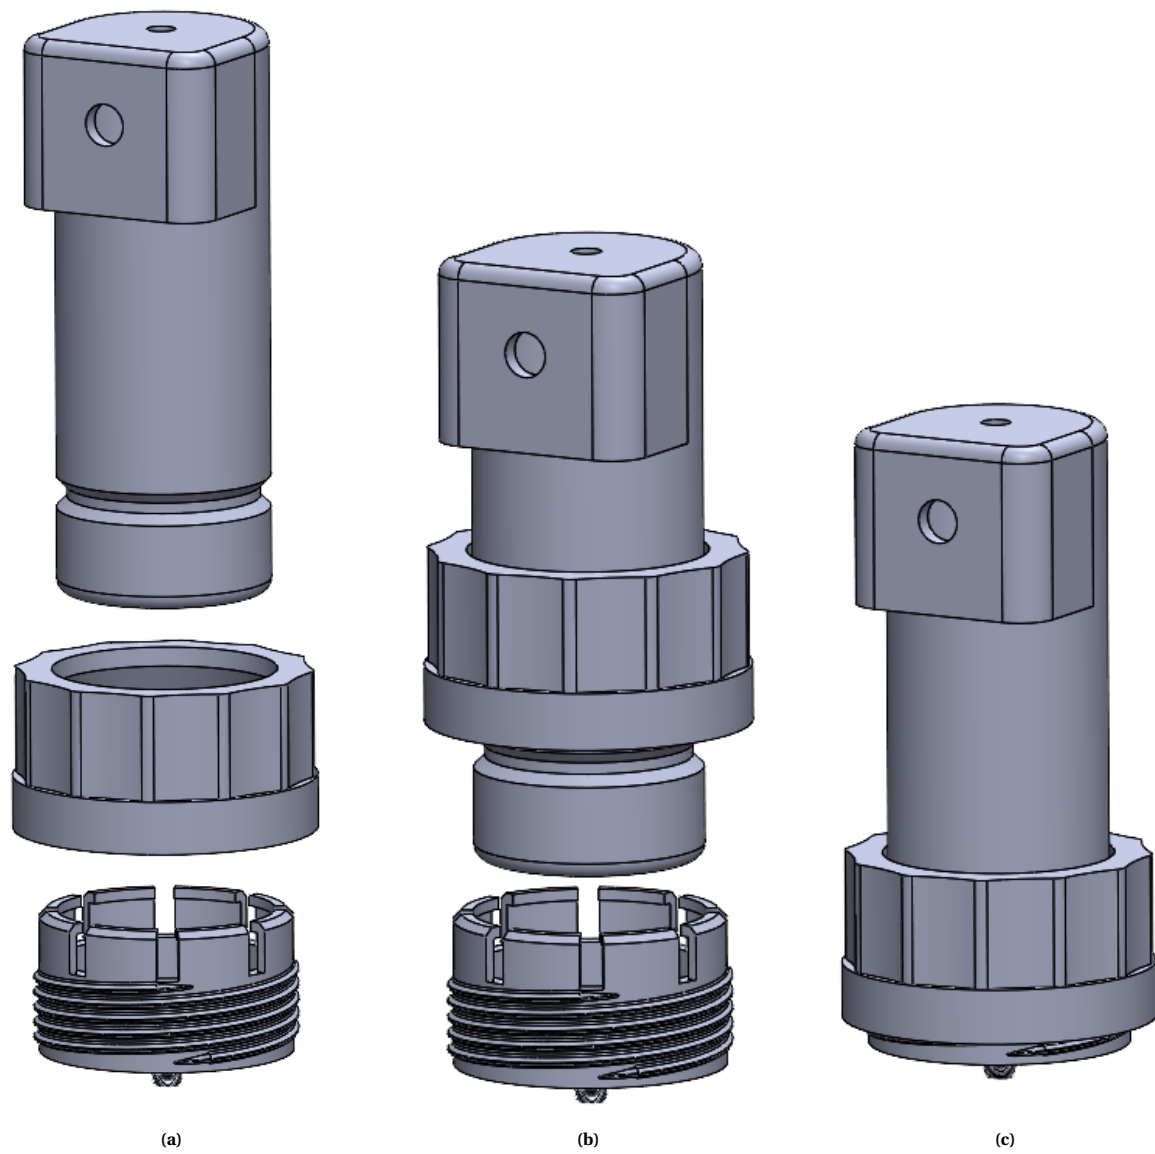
The module and locking guide mechanism. (a): exploded view of the three components; (b): The swivel cap is slid on the module; (c): The swivel cap is twisted on the locking guide. The module is fixated in place.
